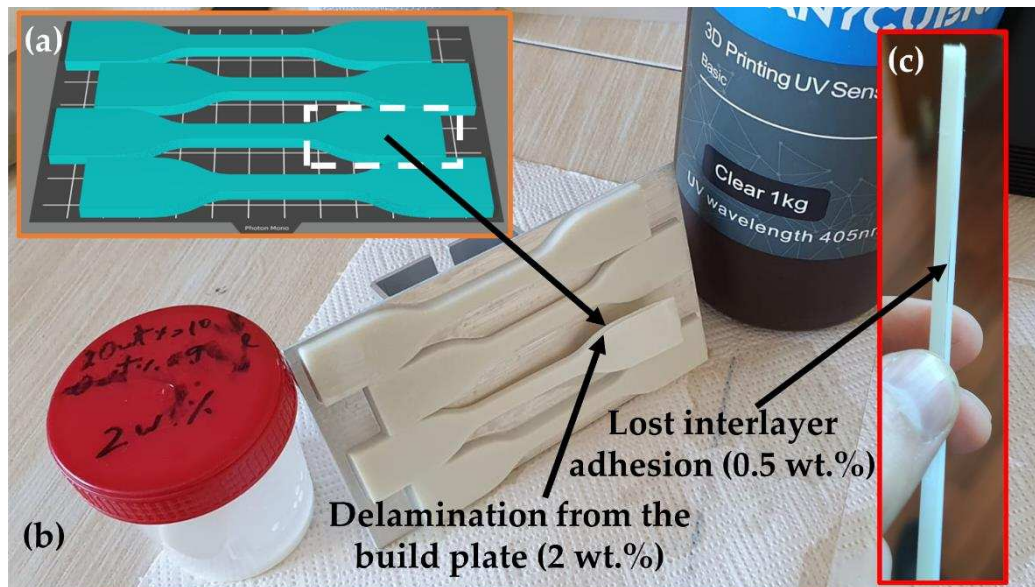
The orientation and layout of CAD objects on the build plate with indicated most failing area (a); DLP specimens with defect caused to one of the specimens by the delamination from the build plate (b); and interlayer adhesion defect (c) caused by transparent film surpassing the adhesion between the build plate and the cured sample.
